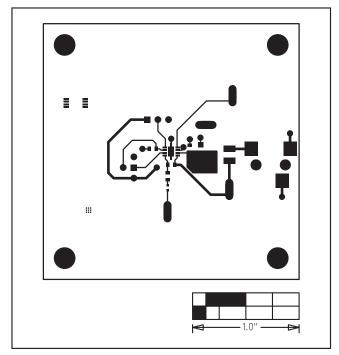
MAX9716 EV Kit PC Board Layout—Component Side
